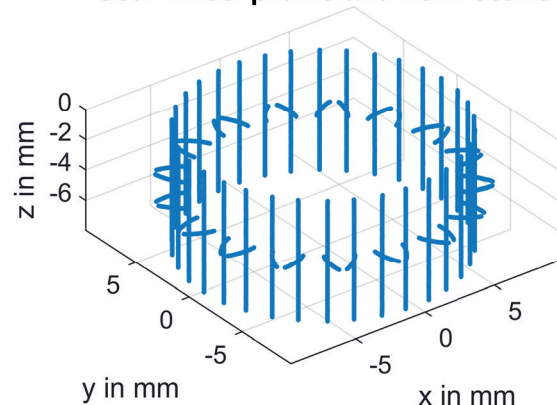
Visualization of a complete tactile gear wheel measurement consisting of profile and helix scans.
